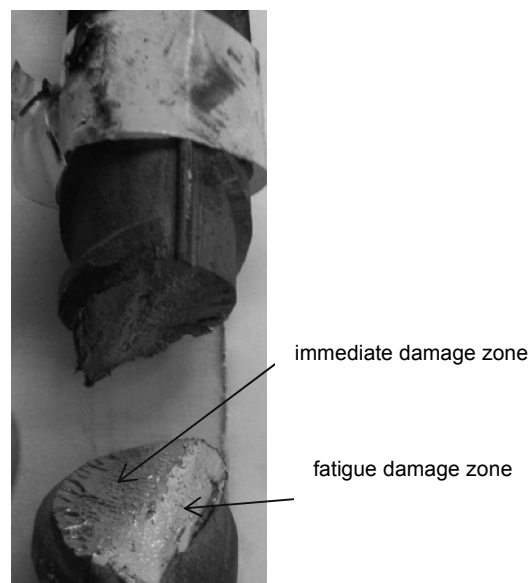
Fatigue fracture of the specimen N° 4
